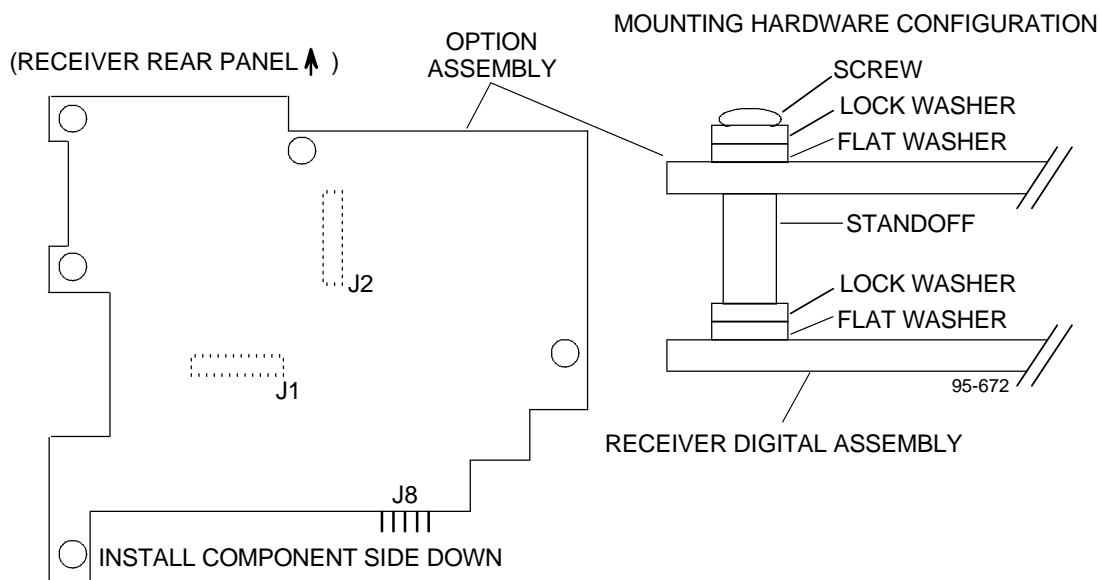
Type 797201-003 Digital Expansion Assembly Hardware Illustration
